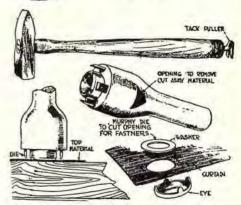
The other end of the hammer (at top of illustration) is fitted with a tack puller, thus combining the two tools. Special dies are required to cut openings for fasteners. The most common type is shown in lower part of the illustration.
